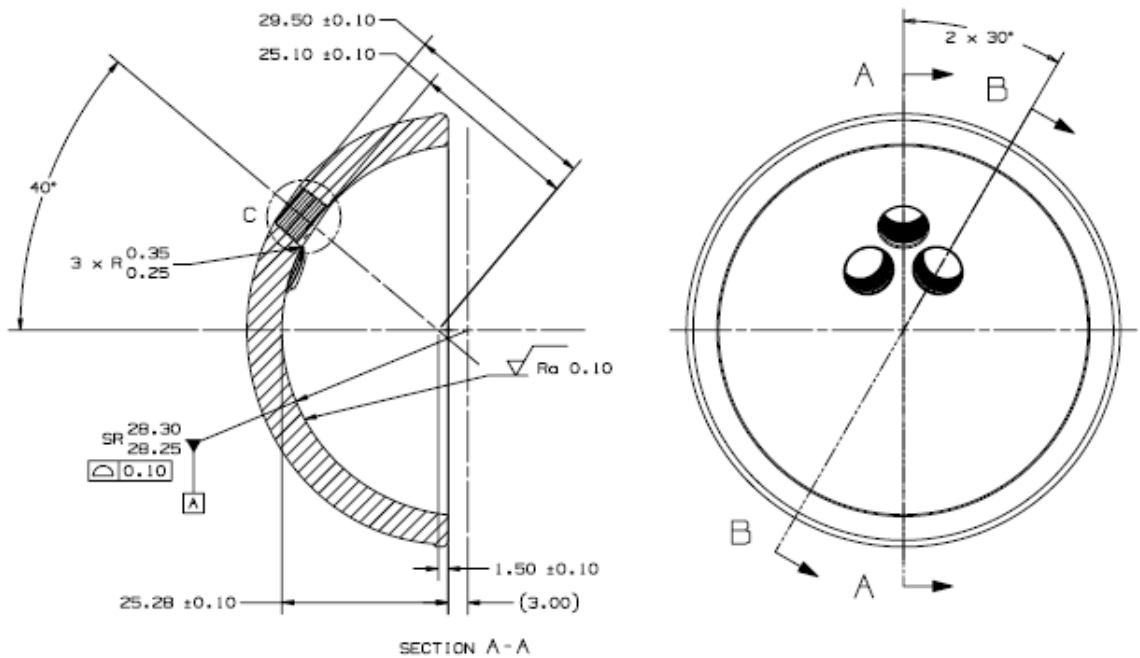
CFR PEEK Monobloc with screws (All dimensions in mm)
